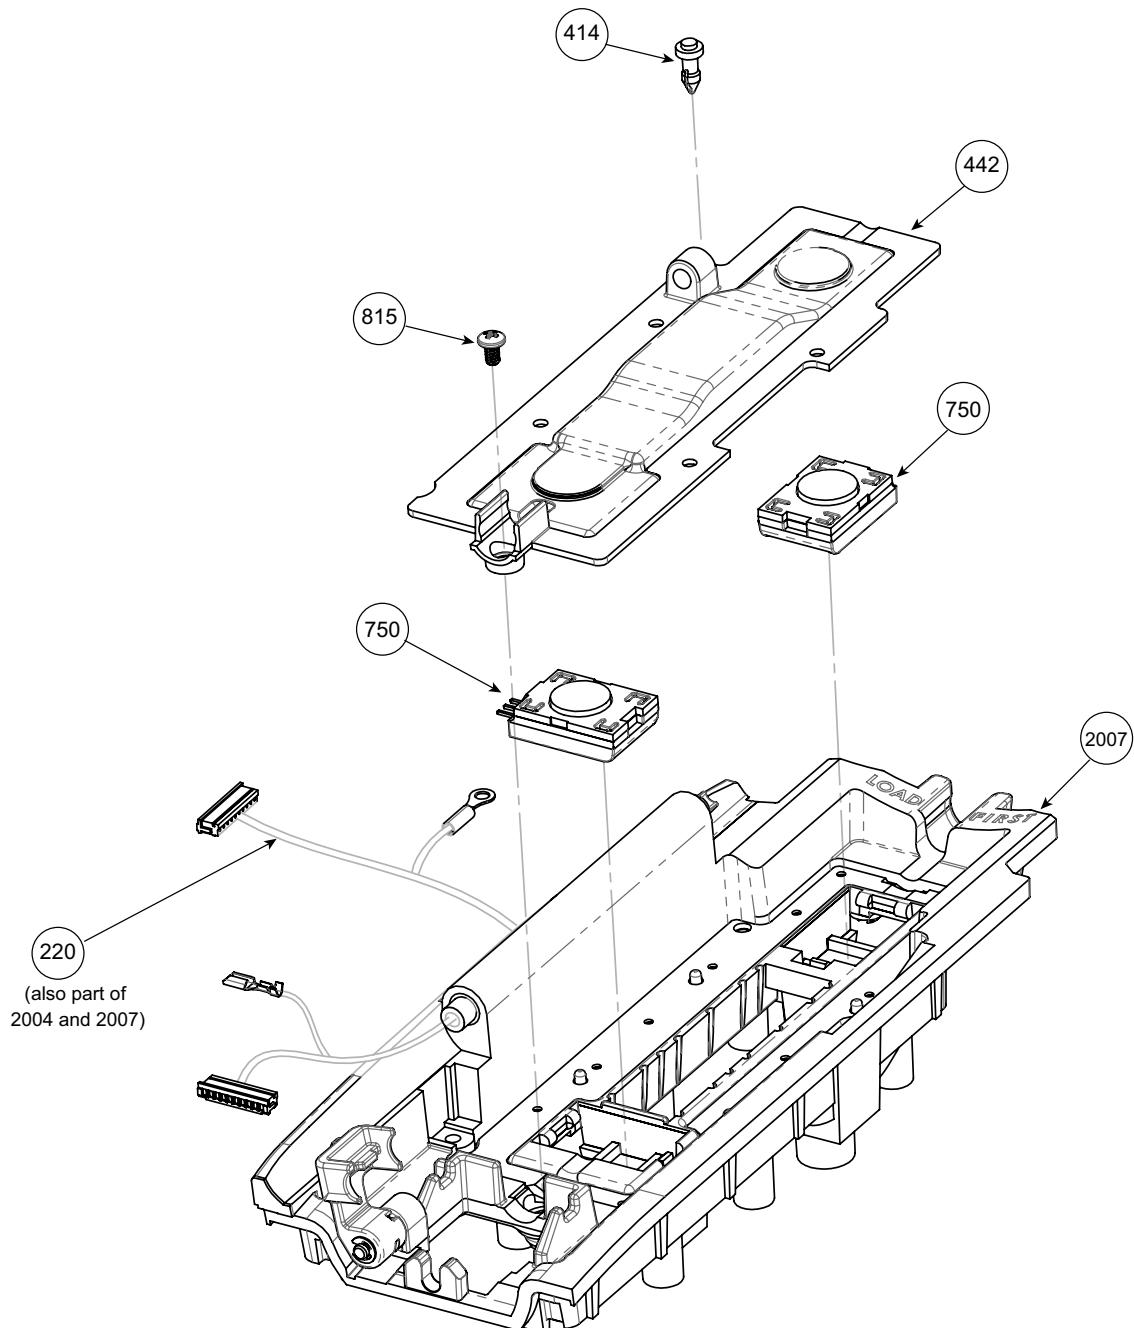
Model 8100 - BD Alaris™ Membrane to Bezel Assembly
